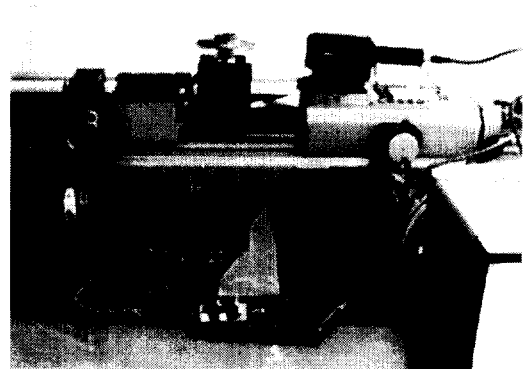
Welding object used Rotate table visual inspection system
